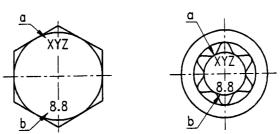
Examples of marking for hexagon-head or six-lobe screws
